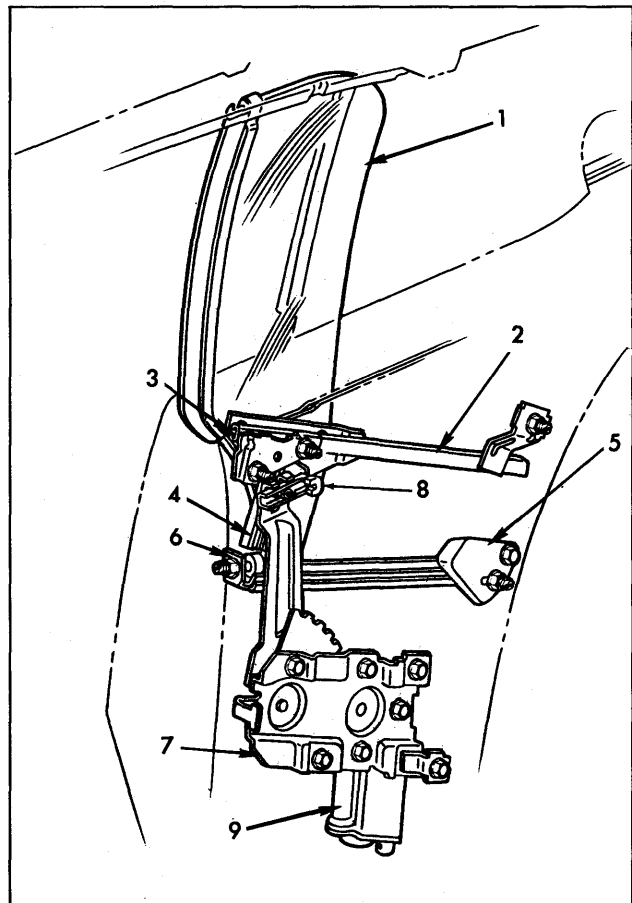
Rear Quarter Hardware - Cadillac "E" Body
